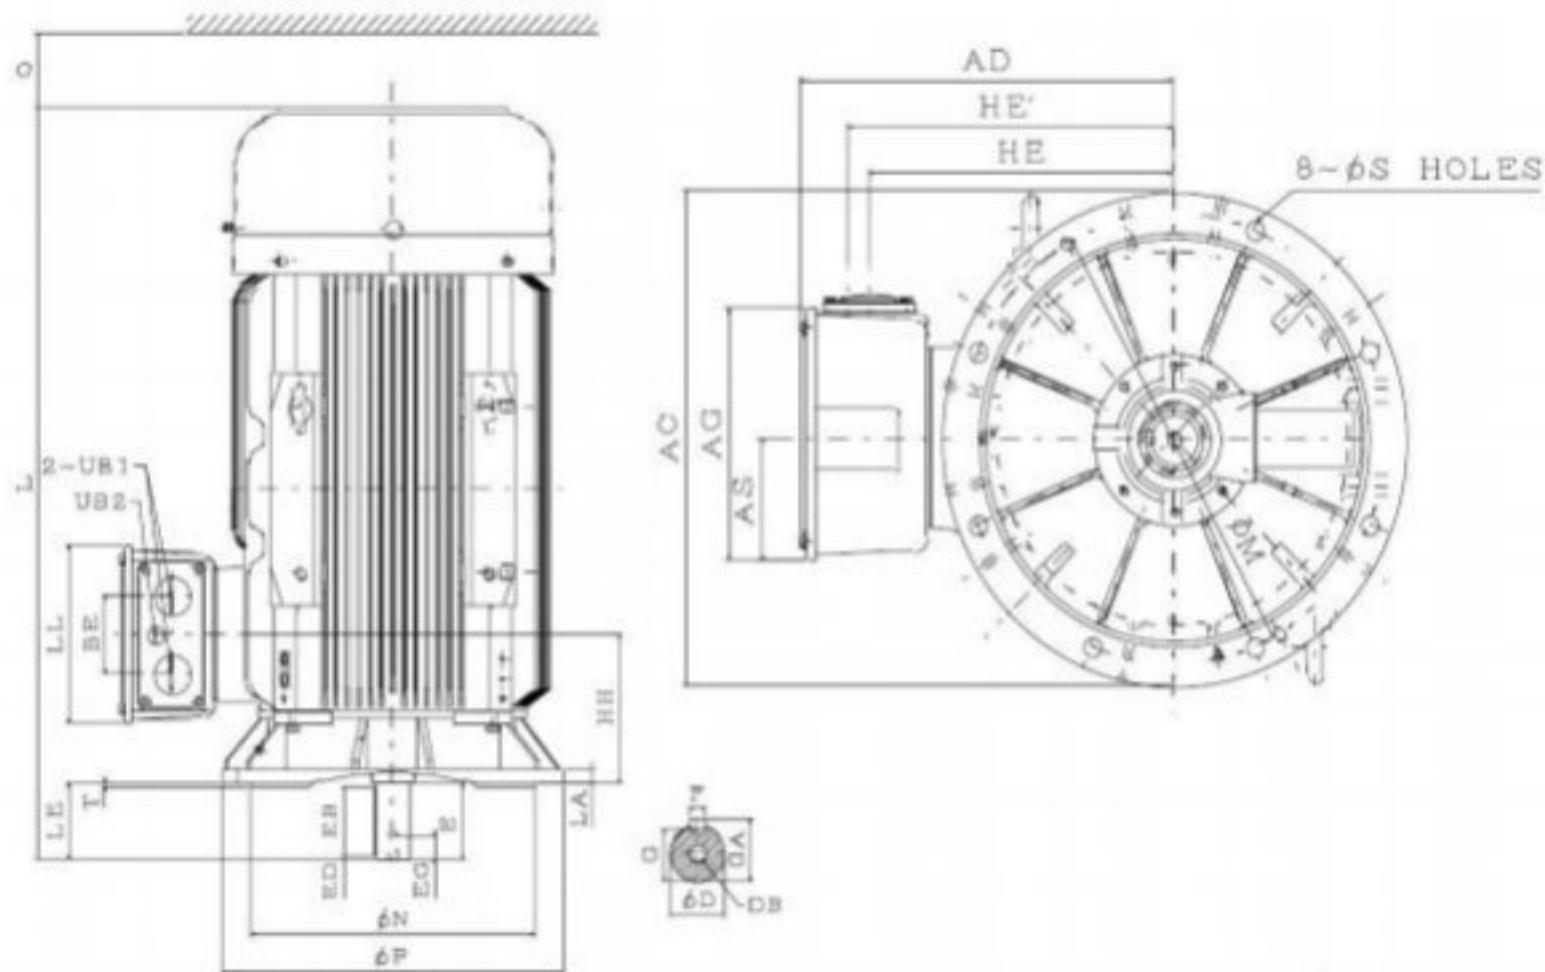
Outline drawing of cast iron design, mounting V1; frame size 315L
